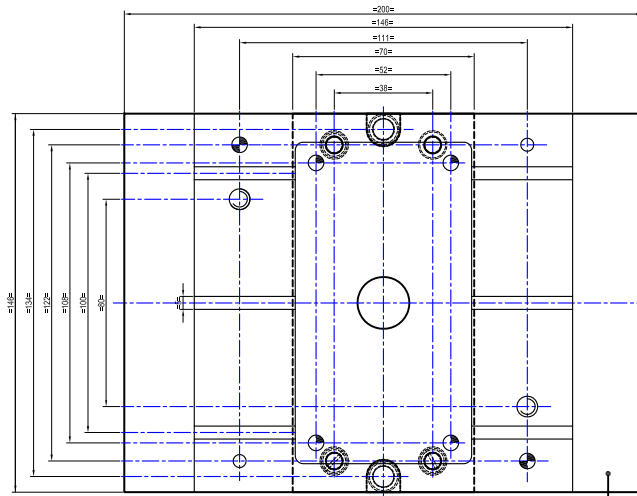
Bottom Half Plan View of mould halves assembly.
